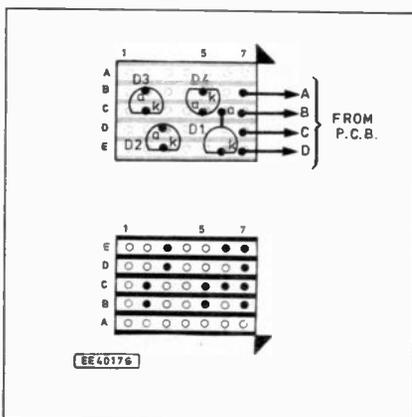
Stripboard l.e.d. display layout. There are no breaks in the underside copper tracks.
